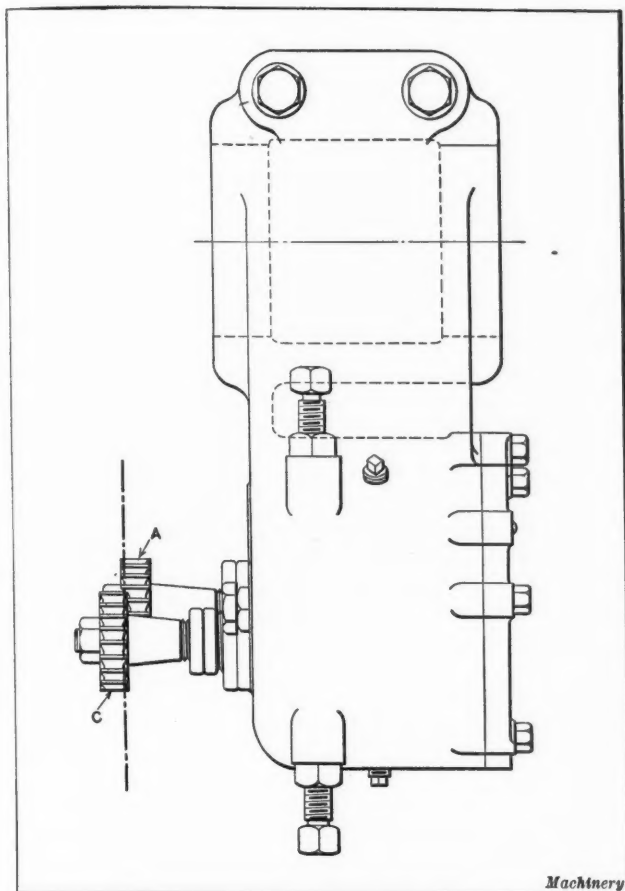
Side Elevation of the Multiple-spindle Milling Head used for splitting Piston-rings
